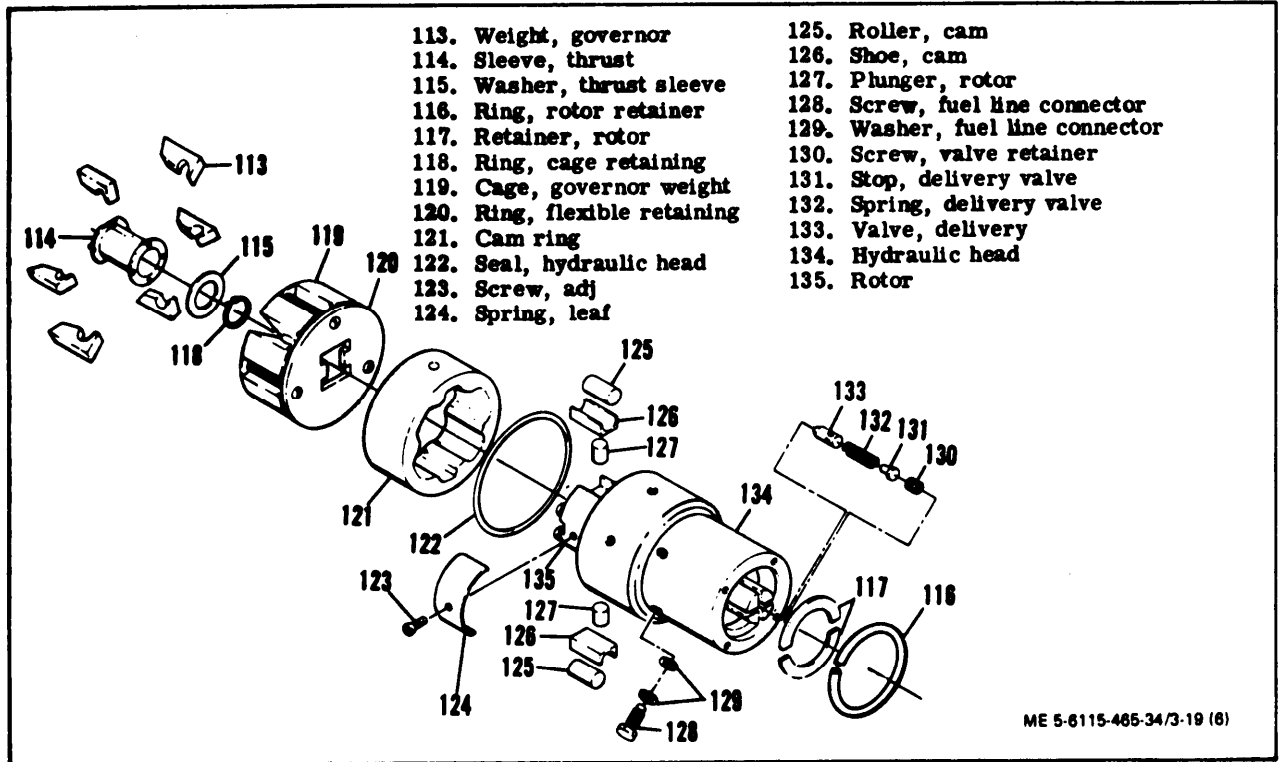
Fuel Injection Pump, Exploded View (Sheet 6 of 7)
